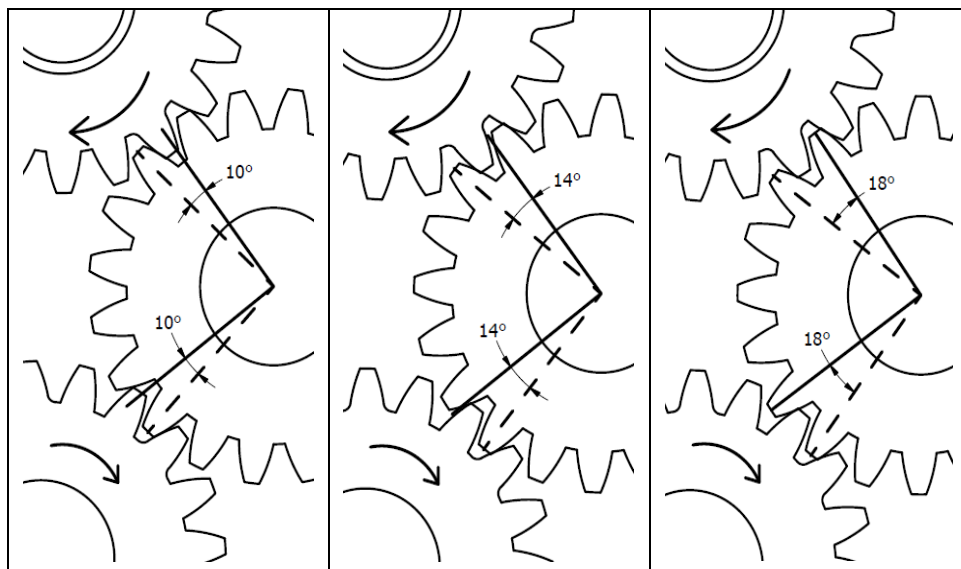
Gear train with one idler gear in load sharing at 10°, 14° and 18° angular positions.
